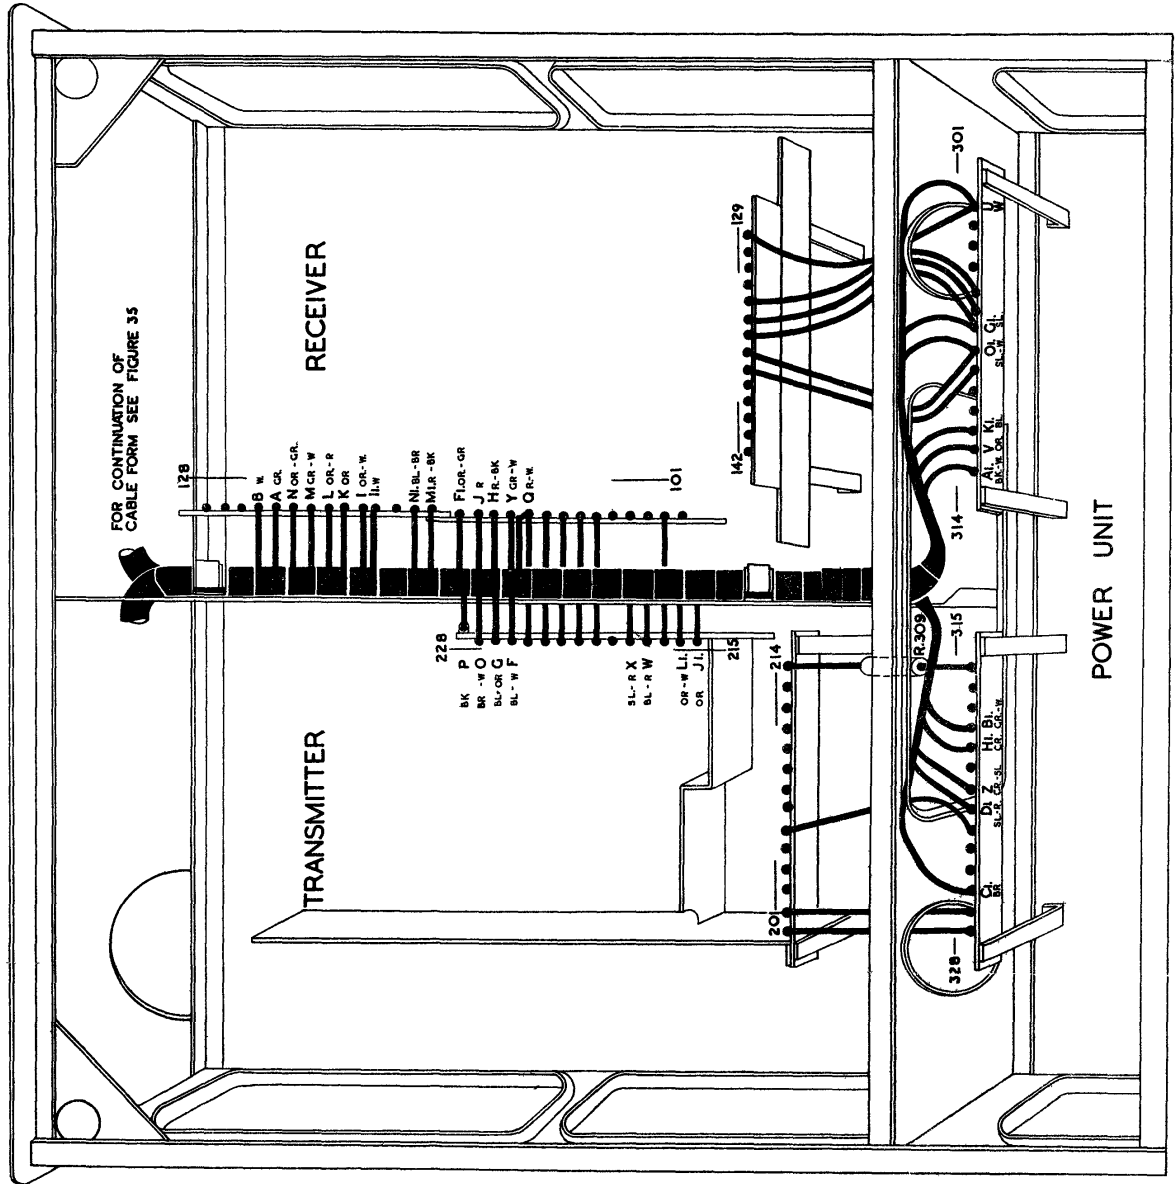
CHASSIS BENCH WIRING DIAGRAM.
